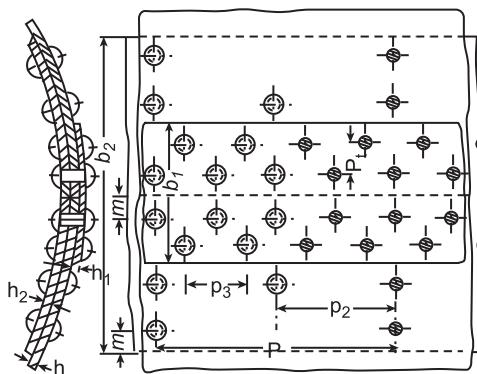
Quadruple-riveted double-strap butt joint.
